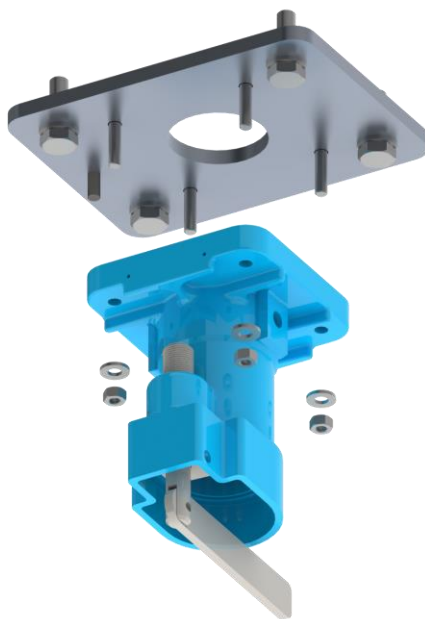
Rockstarter Adaptor Plate (60A pictured)
